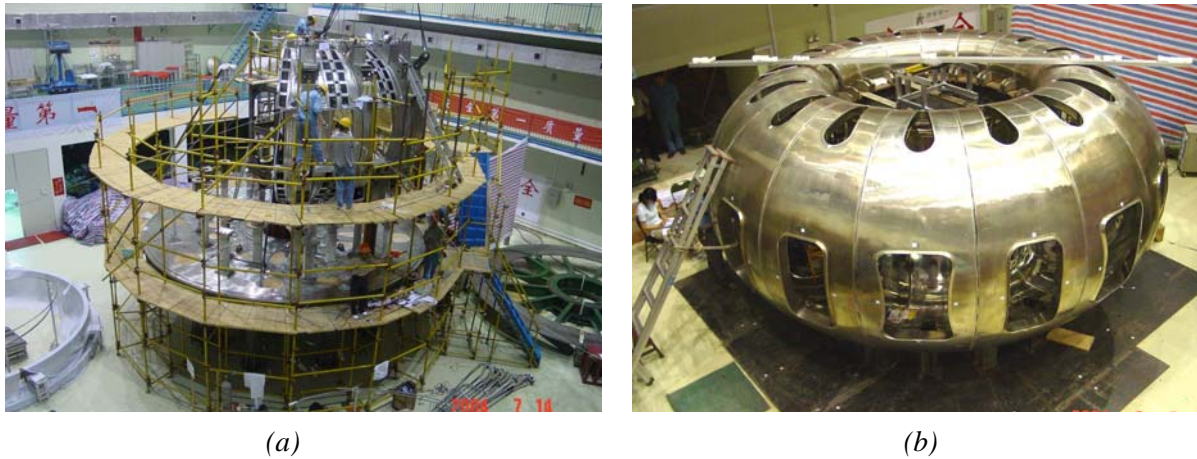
Pre-assembly of four TF coils (a) and the body of VV (b)
